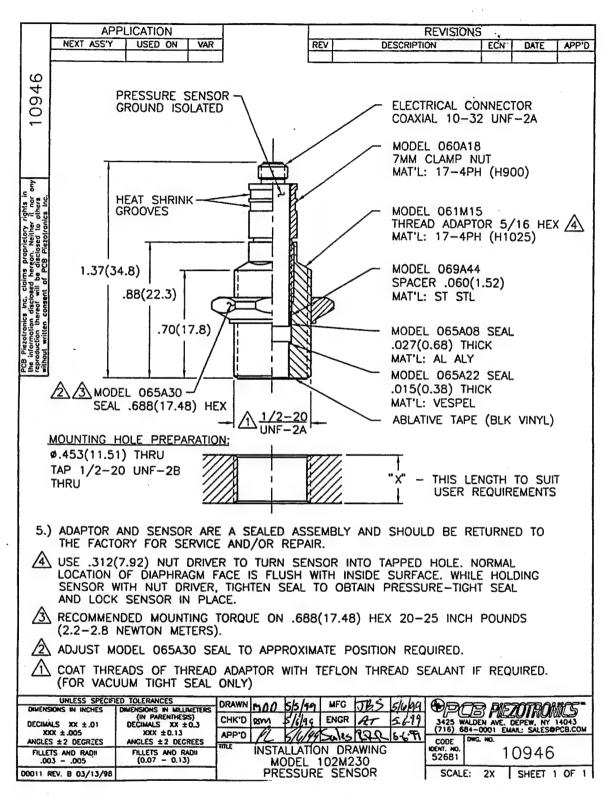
Engineering drawing of PCB 102M230 pressure gauge.
